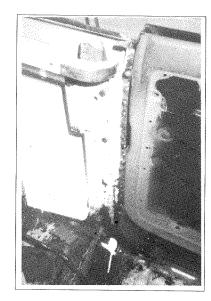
Welds complete and awaiting dressing back flush with the grinder. Note that the door was left on as a general check against the fit of the wing.
